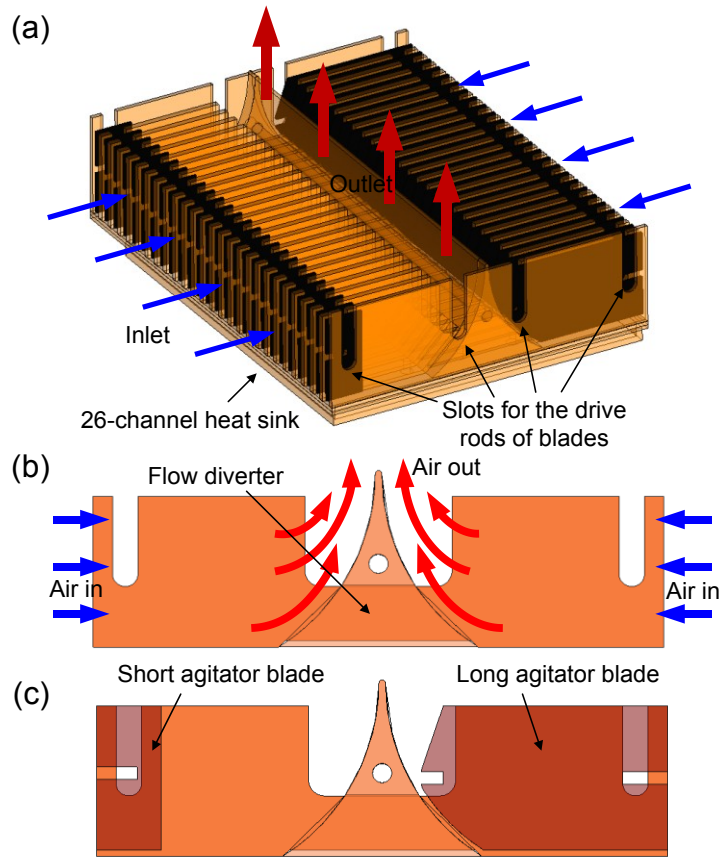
(a) Copper heat sink with 26 channels, (b) cross sectional view of the heat sink channel, (c) blades installed in the channel.
